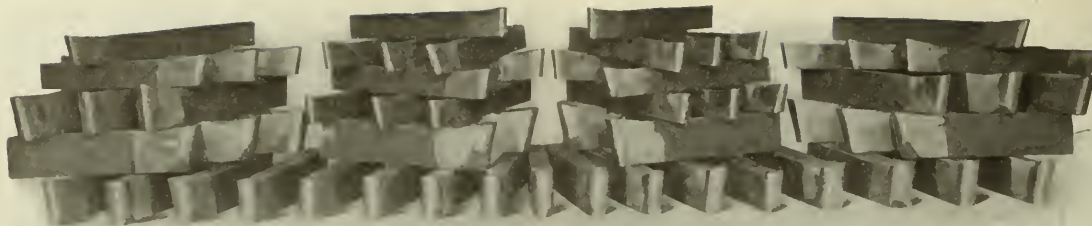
Cutting Tools with Points welded onto Shanks after being ground Ready for Use
